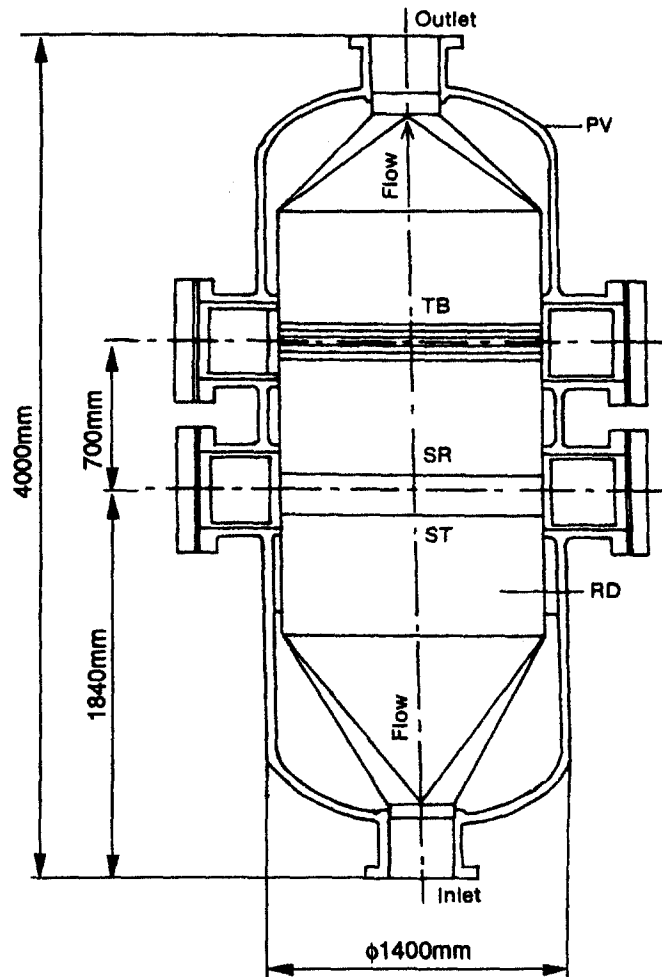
EVA I test section: straight tube model 1. PV, pressure vessel; RD, rectangular duct; ST, single tube; SR, single row; TB, tube bundle.
